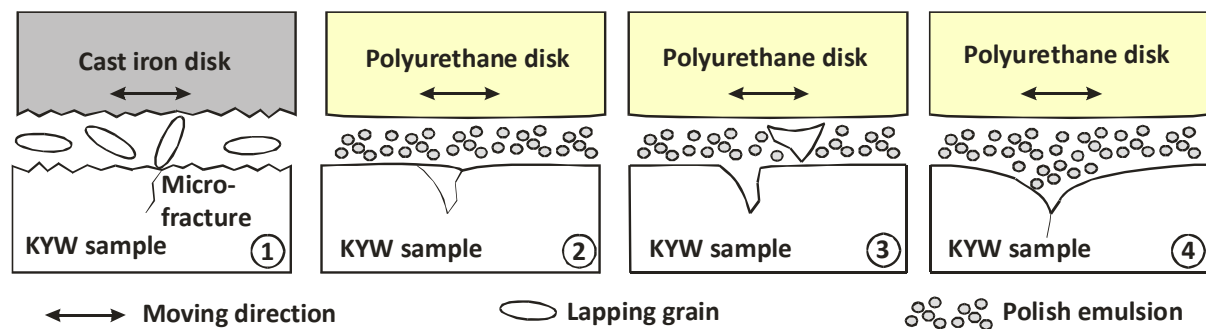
Formation of surface defects during polishing caused by too much pressure. Invisible micro-fracturing occurs during the previous lapping step at too large pressures (1). The micro-fractures propagate (2) until chipping of surface occurs (3). After long polishing times > 1h the defects are not washed out; the micro-fractures seem to keep on propagating (4).
